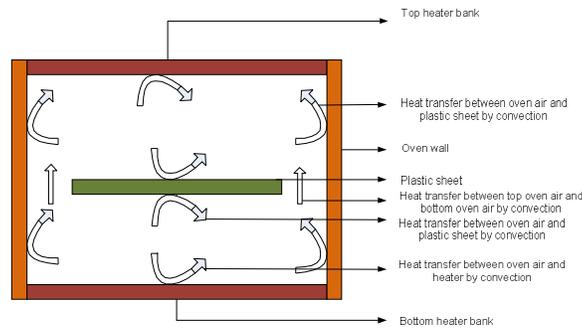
(a). Heat transfer to top and bottom oven air of heating phase in thermoforming process (front view)
